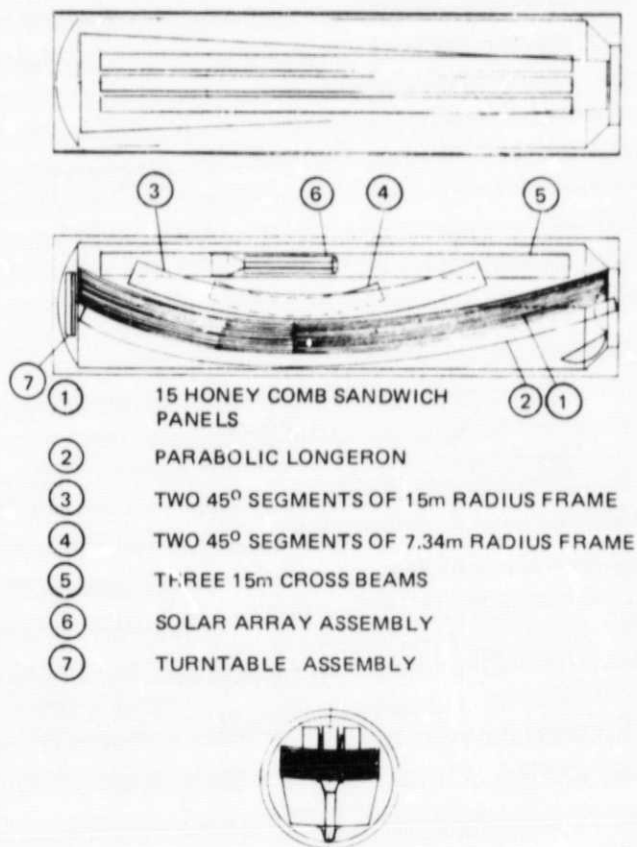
Radiometer Packaging Inside Fabrication and Assembly Module
